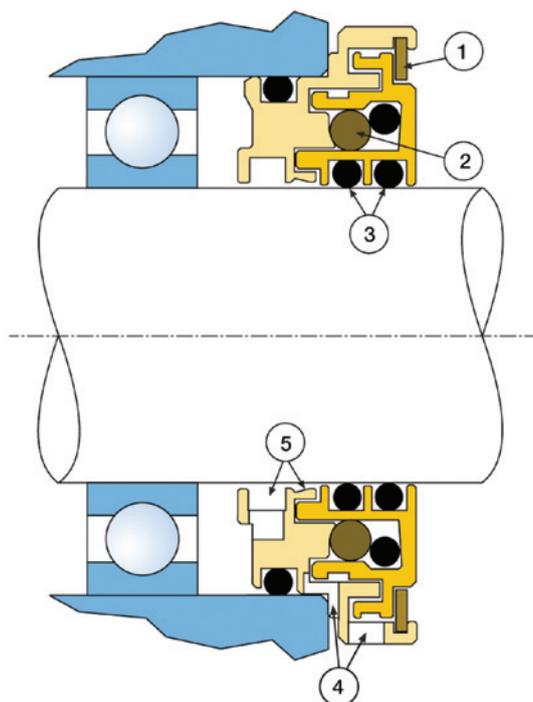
Modern rotating labyrinth bearing protector (diagram courtesy of AESSEAL, Inc)
